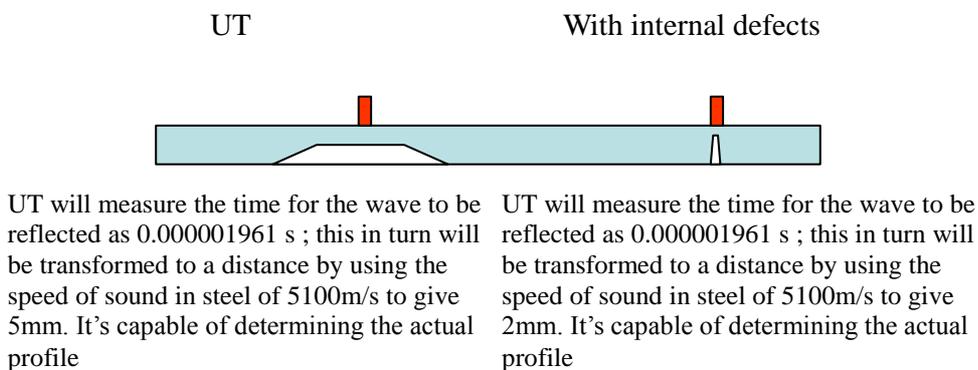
Schematic of UT Inspection Techniques showing resolution of internal defects/corrosion
